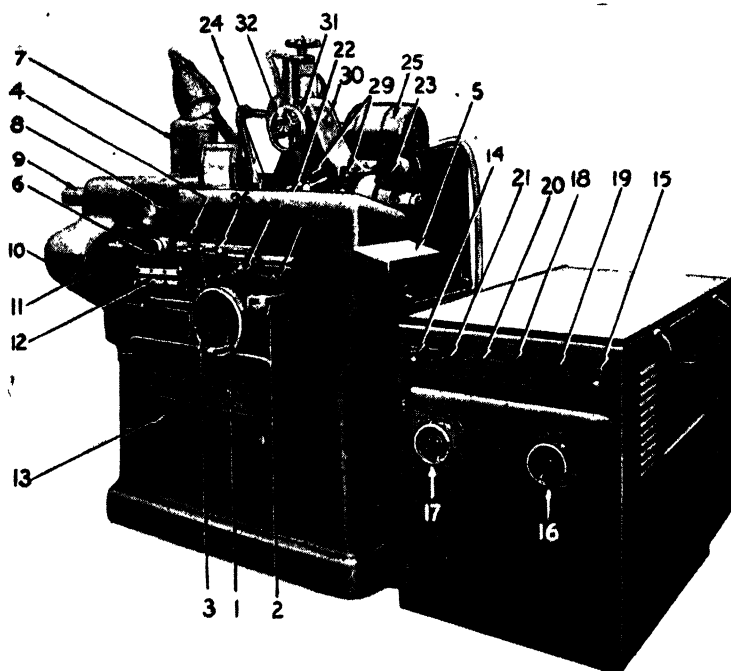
MATRIX MODEL No. 16G, THREAD-GRINDING MACHINE
